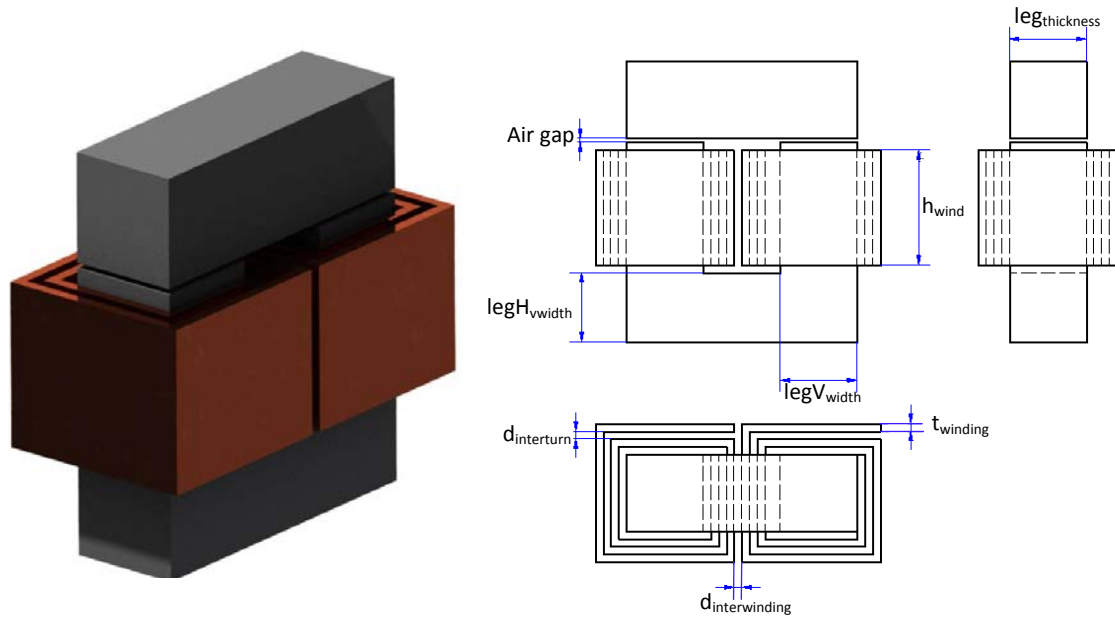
left) 3D view of a two-phase coupled inductor & right) dimensions used to describe the object
